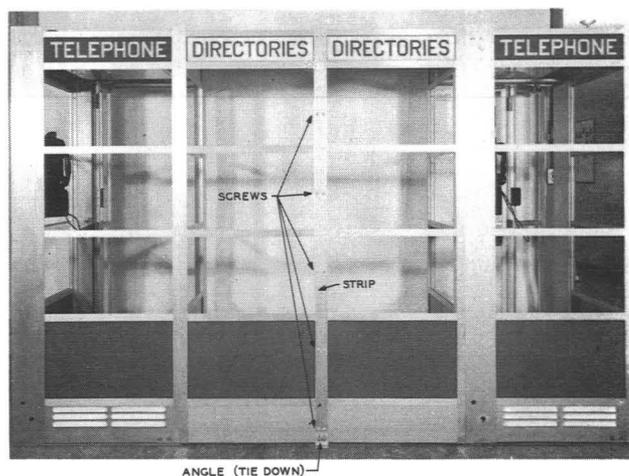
REAR VIEW OF ASSEMBLED PANELS
